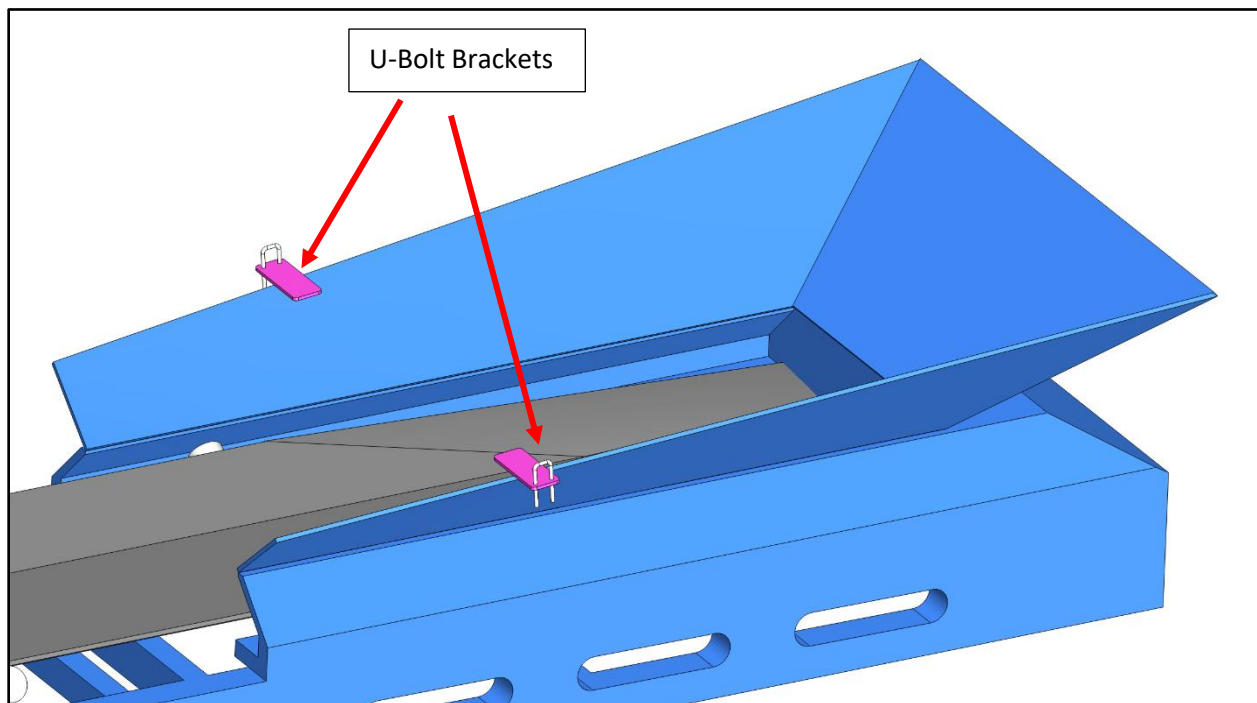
Showing optional U-bolt brackets (pink) welded to the conveyor structure (blue)
